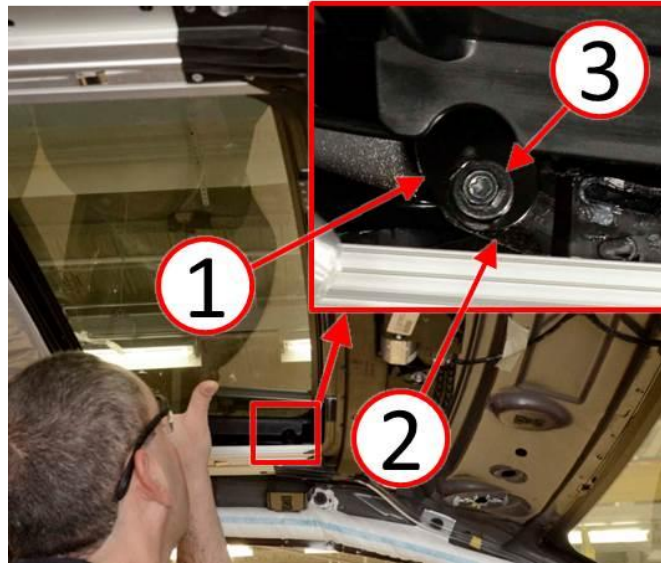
Sunroof Glass Panel Mounting Tab Inspection
